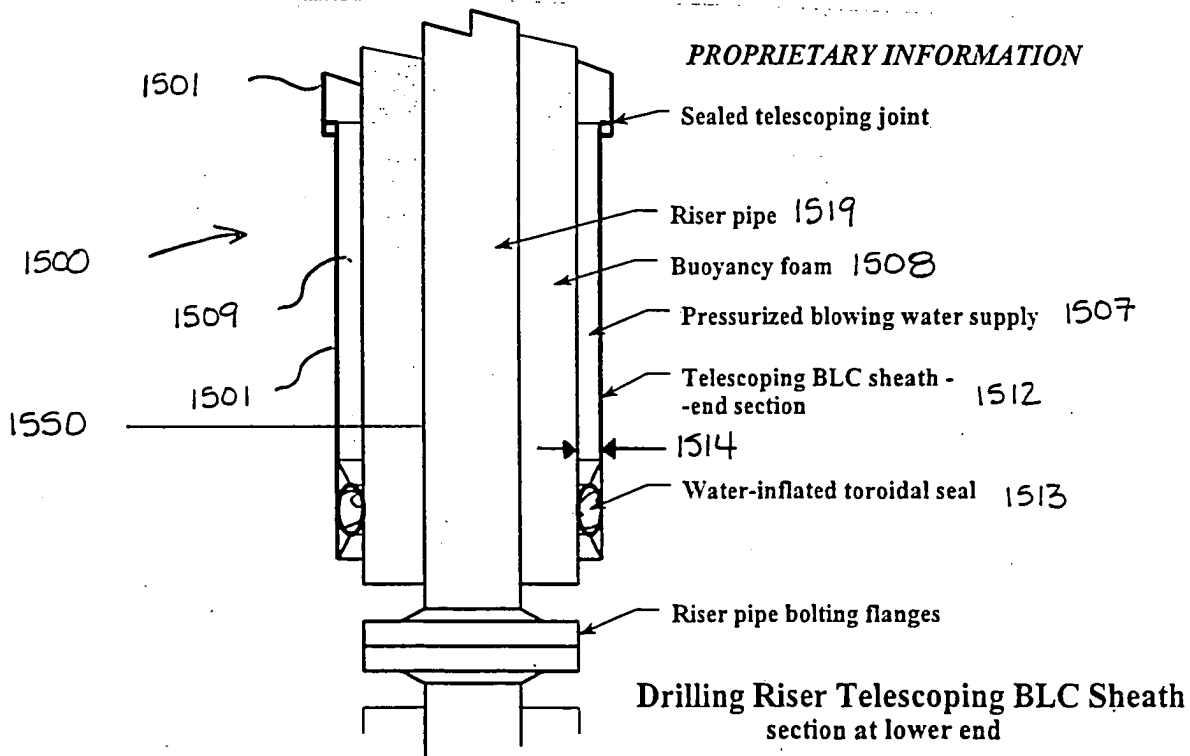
D Drilling Riser BLC, Telescoping Sheath Lower End
